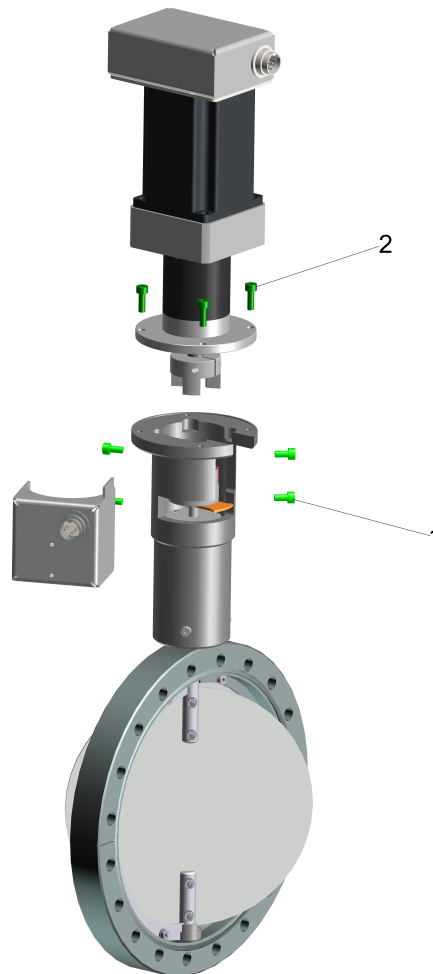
Schematic of the UHV throttle valve (single blade), showing the parts that must be removed prior to bakeout.
